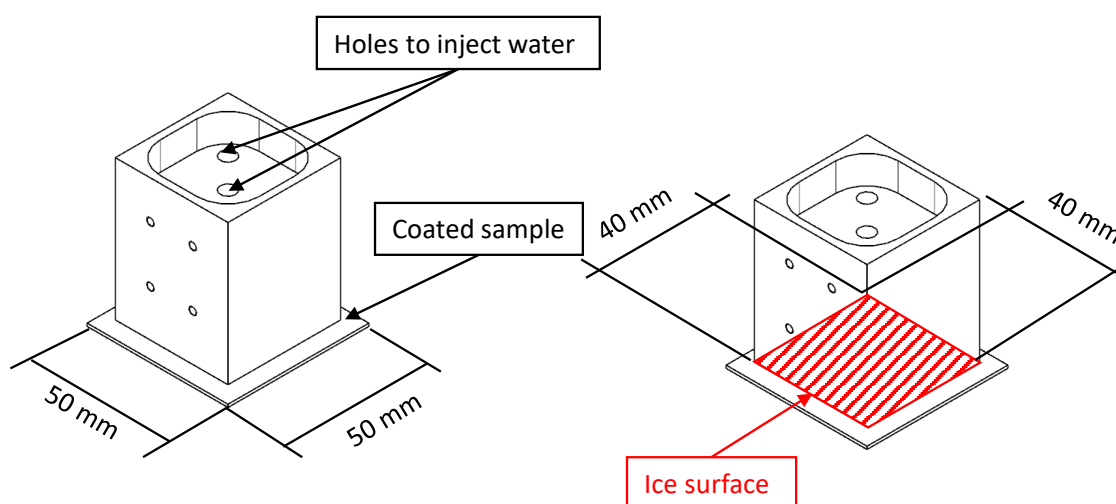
First prototype of Aluminium sample holder constructed for the second approach using shear stress. The last prototype had five holes to inject water with the same dimensions.
